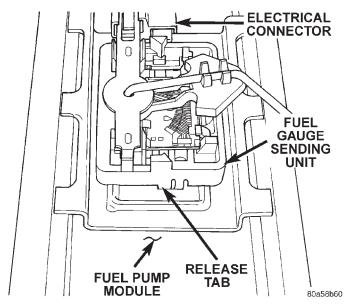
Fuel Gauge Sending Unit Release Tab INSTALLATION
